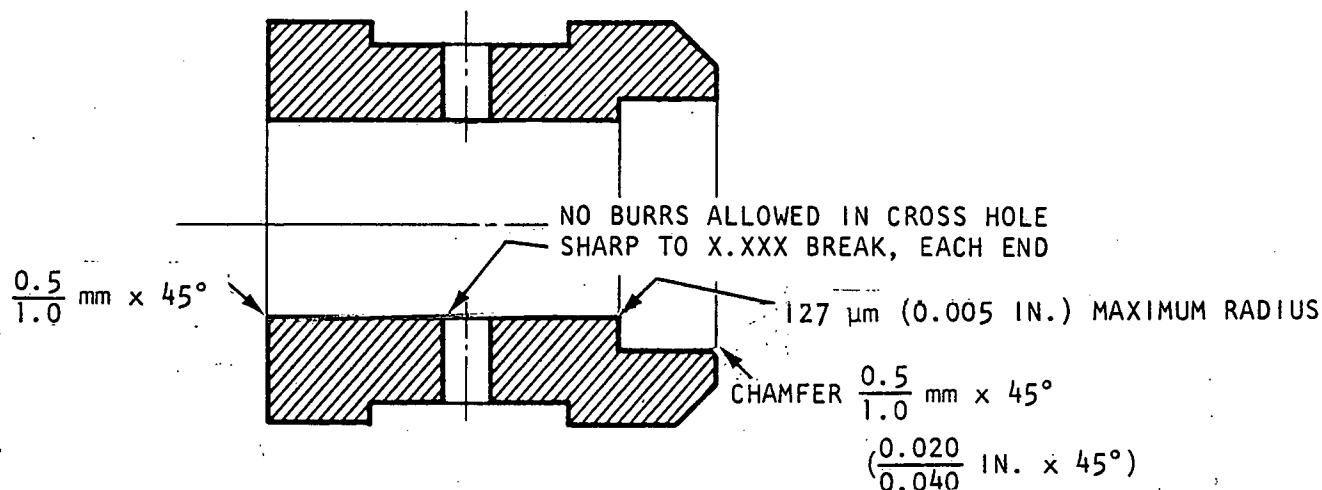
Typical Burr Notes for Internal Edges⁵⁵
